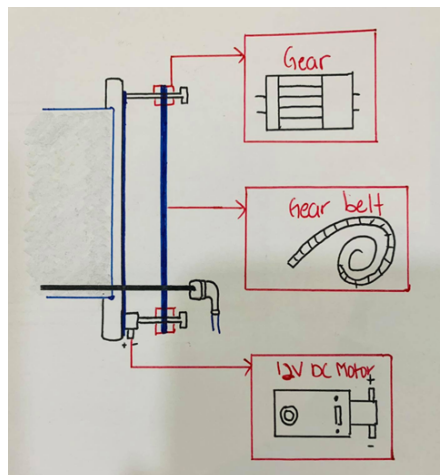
Hand sketch of the gear mechanism for the smart wiper washing system
